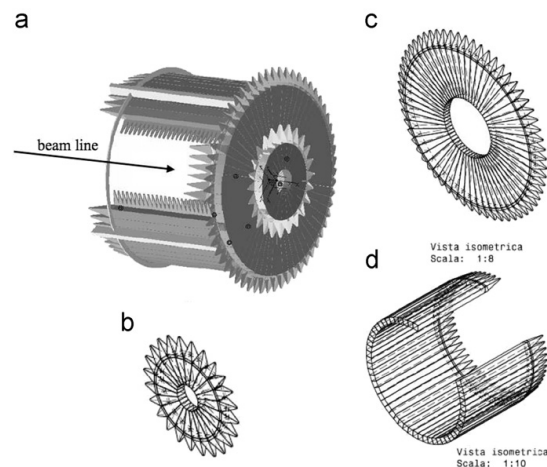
Technical drawing of the KENTROS Proton Tagger: (a) general assembly, (b) small end-cap, (c) big end-cap and (d) barrel.
